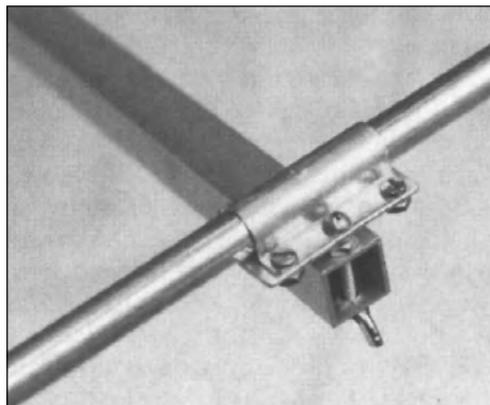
Photo detailing attachment of the reflector to the square-section boom, using two #10 bolts and wingnuts.
